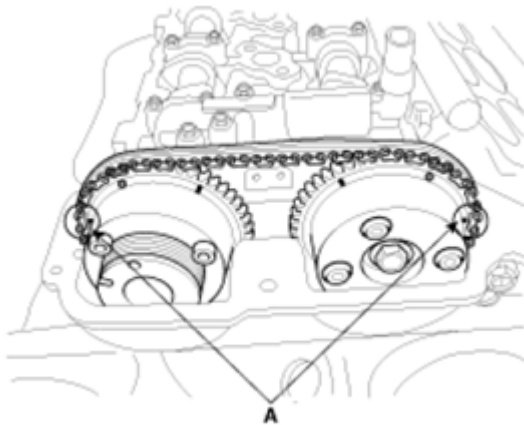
Identifying Crankshaft Sprocket And Camshaft Sprocket Timing Marks
